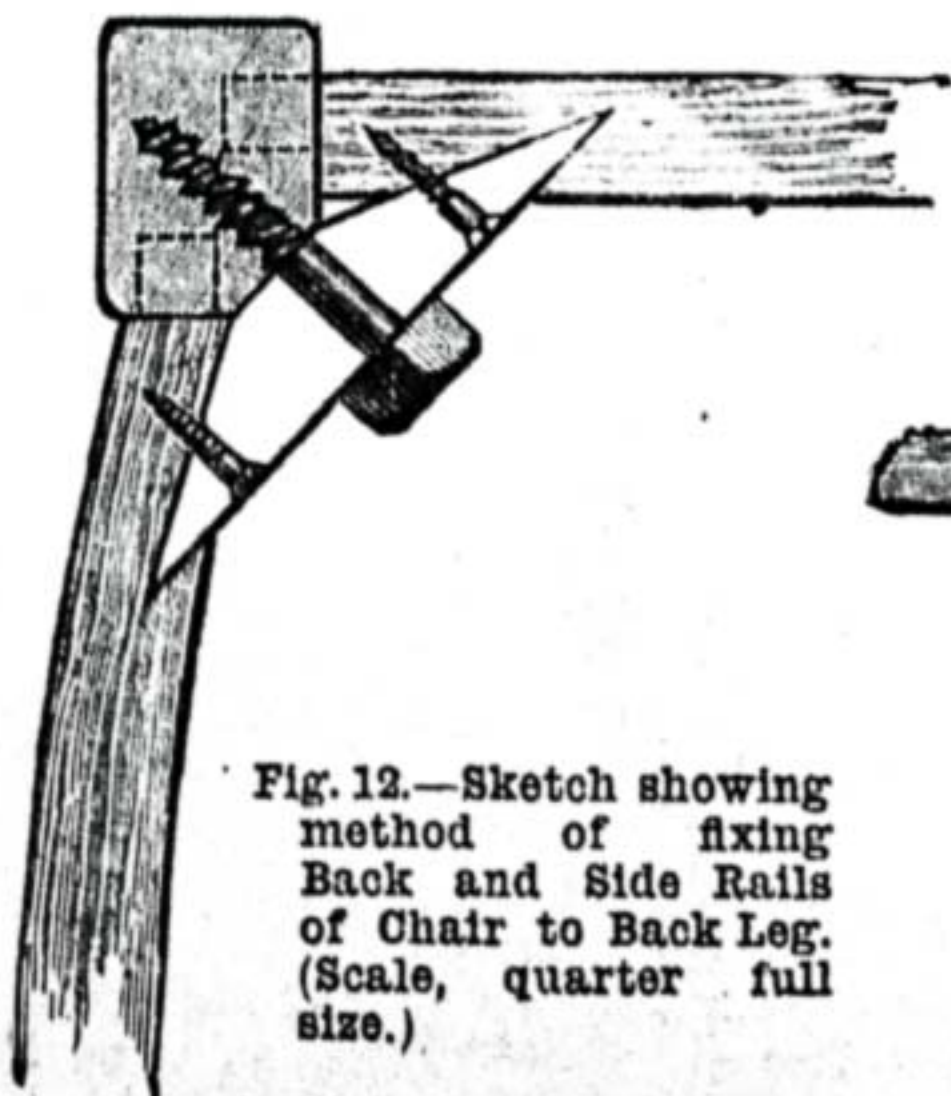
Sketch showing method of fixing Back and Side Rails of Chair to Back Leg. (Scale, quarter full size.)
